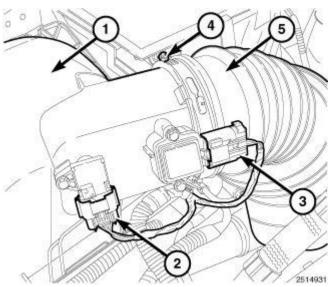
Air Cleaner Body, TBAP Sensor, MAF Sensor, Clamp & Intake Air Tube Courtesy of CHRYSLER GROUP, LLC
